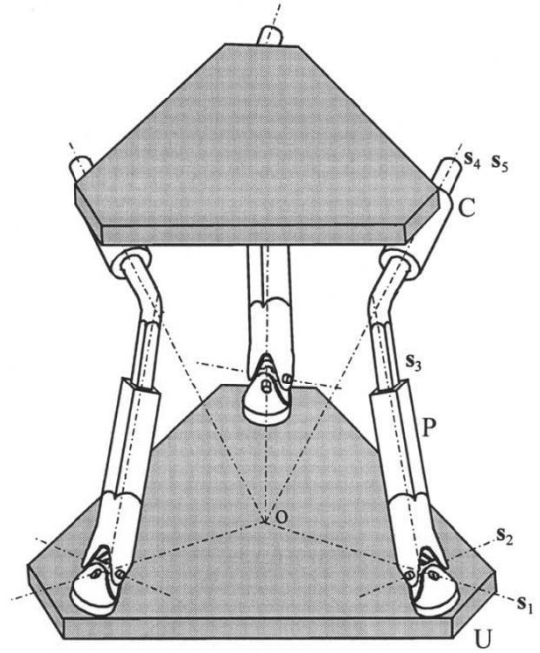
A 3-UPC rotational parallel mechanism [12]
